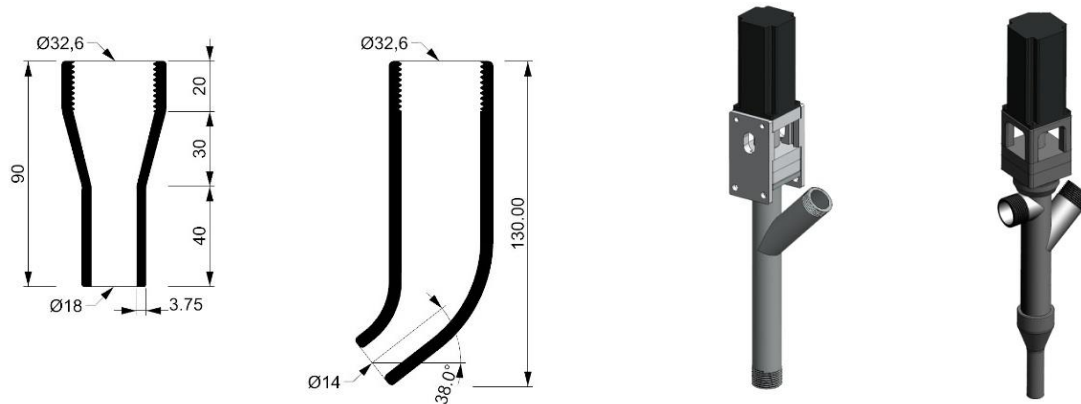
a) Nozzle TP-18 – Section b) Nozzle TP-14-38deg – Section c) Isometry of printhead PH1 in Autodesk Fusion 360 d) Printhead PH3
